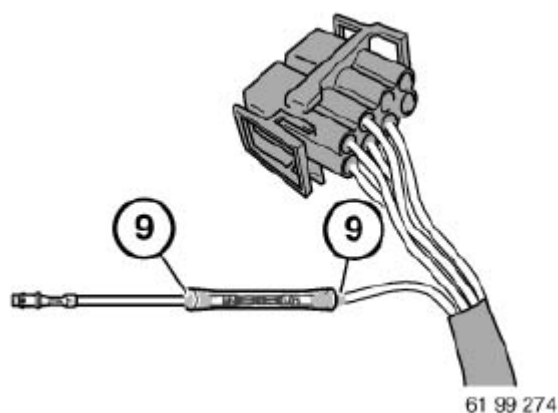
Shrinking Sleeve On Both Sides With Hot Air Blower
